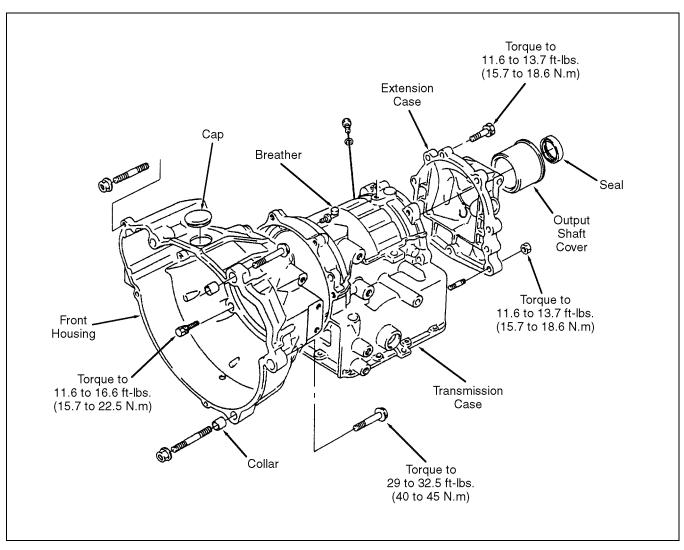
J-5. Front Housing and Rear Extension Removal and Installation
